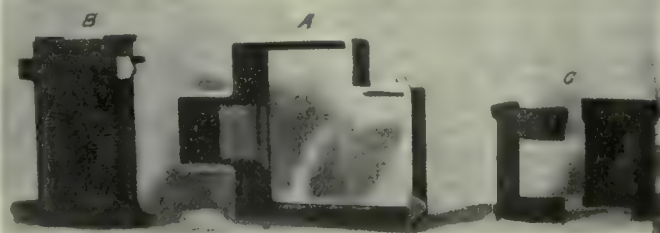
TYPICAL SAMPLES OF WORK FACED ON HORIZONTAL GRINDING MACHINE.
